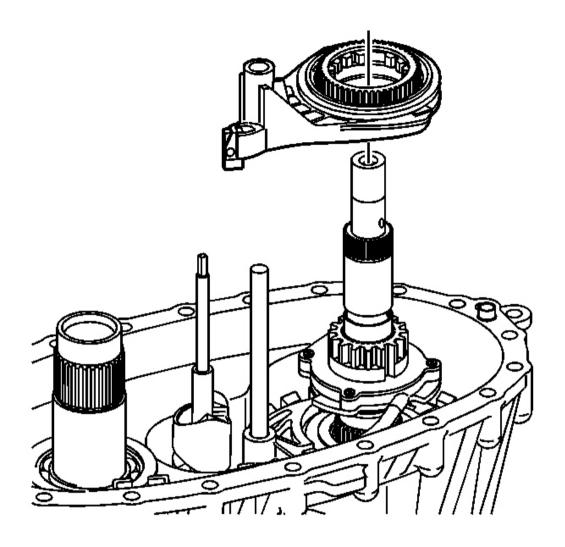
Identifying Lockup Shift Assembly & Lockup Mode Shift Fork Courtesy of GENERAL MOTORS CORP.
